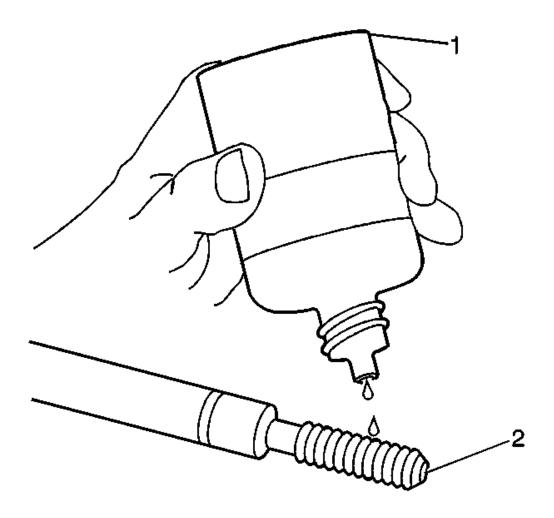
Lubricating Installer Tool Using Driver Oil Courtesy of GENERAL MOTORS COMPANY
